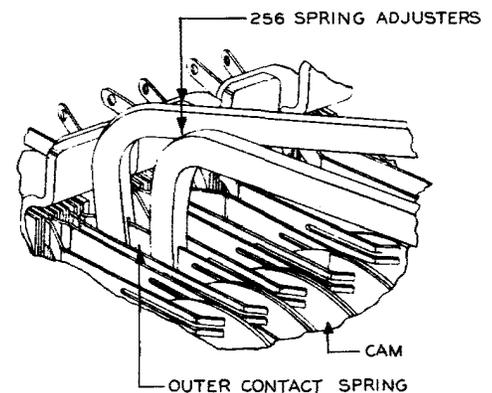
Method of Changing Length of Outer Sequence Switch Springs Using Two 256 Spring Adjusters
